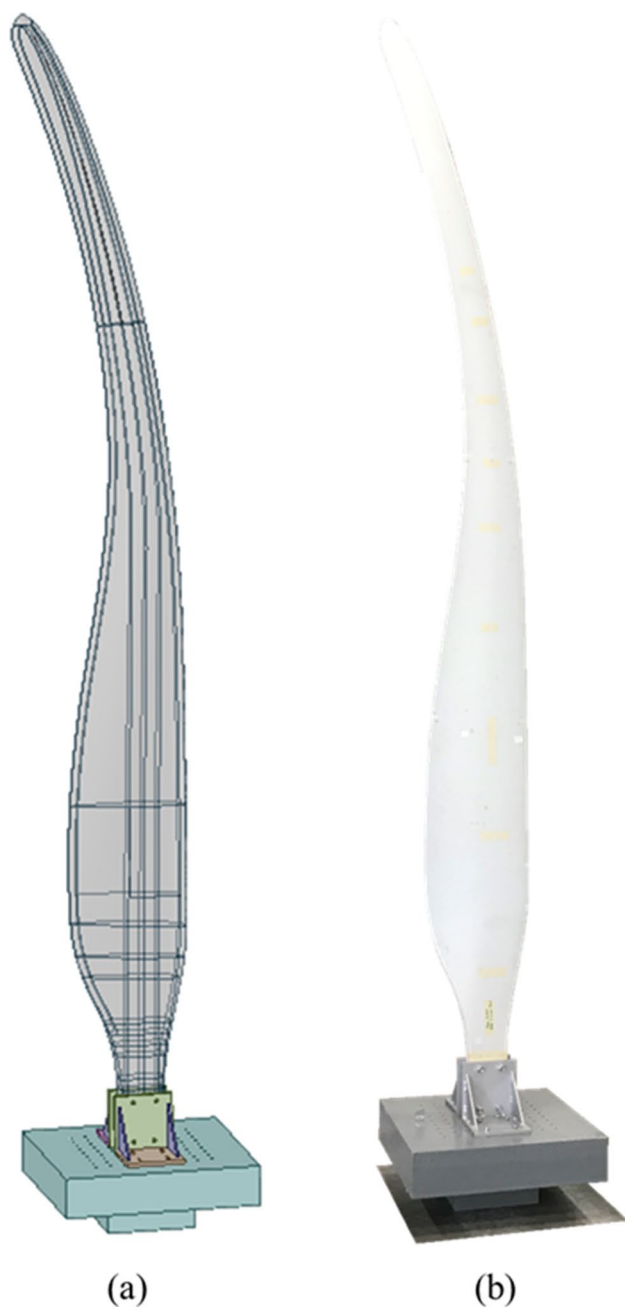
Testbed. (a) CAD Geometry; (b) Photo
